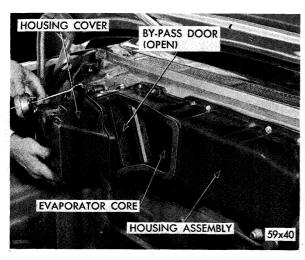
Removing or Installing Heater Core Housing Assembly
